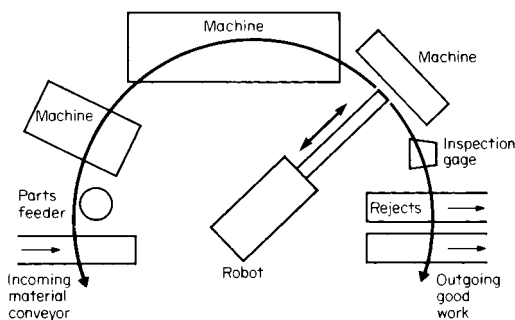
Robot work cell. Robot is positioned to service a number of machines clustered about it.
